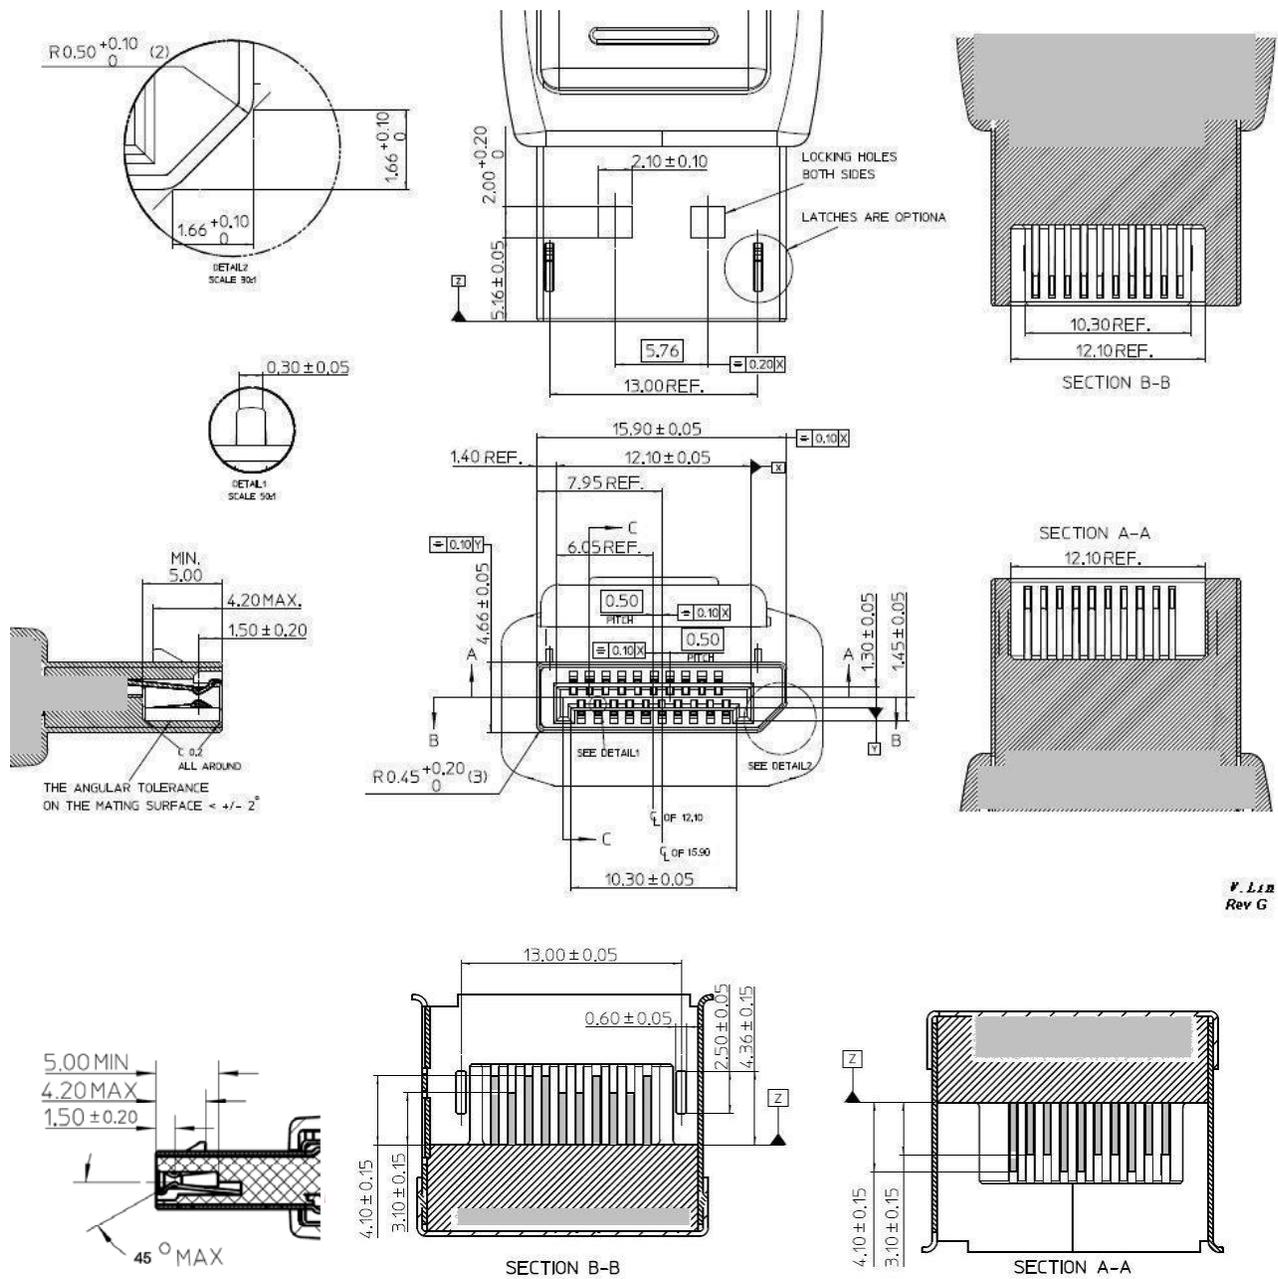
DisplayPort External Cable-Connector Assembly Drawings
